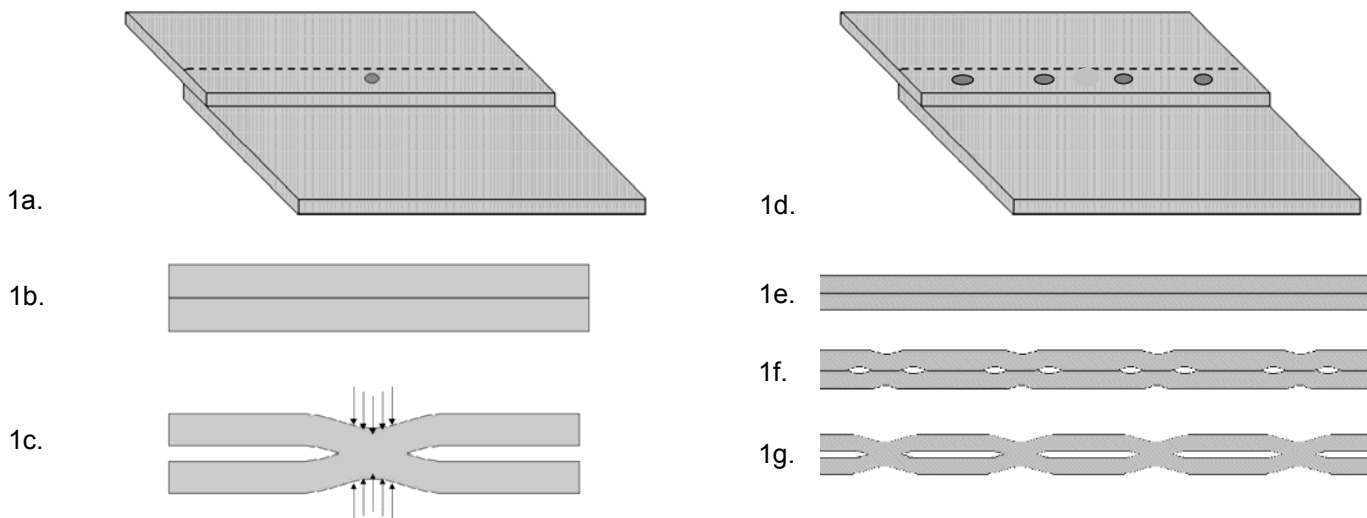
Schematic diagrams of two plates joined by a lap joint (1a and 1b). Before welding, the plates overlap with nominally uniform contact as illustrated for a two-dimensional slice through the center of the joint (1b and 1e). As the weld nugget forms, the joint surfaces deform (1c). Weak spot welds cause minimal deformation of the joint surfaces (1f) compared to the deformation that occurs with strong welds (1g).
